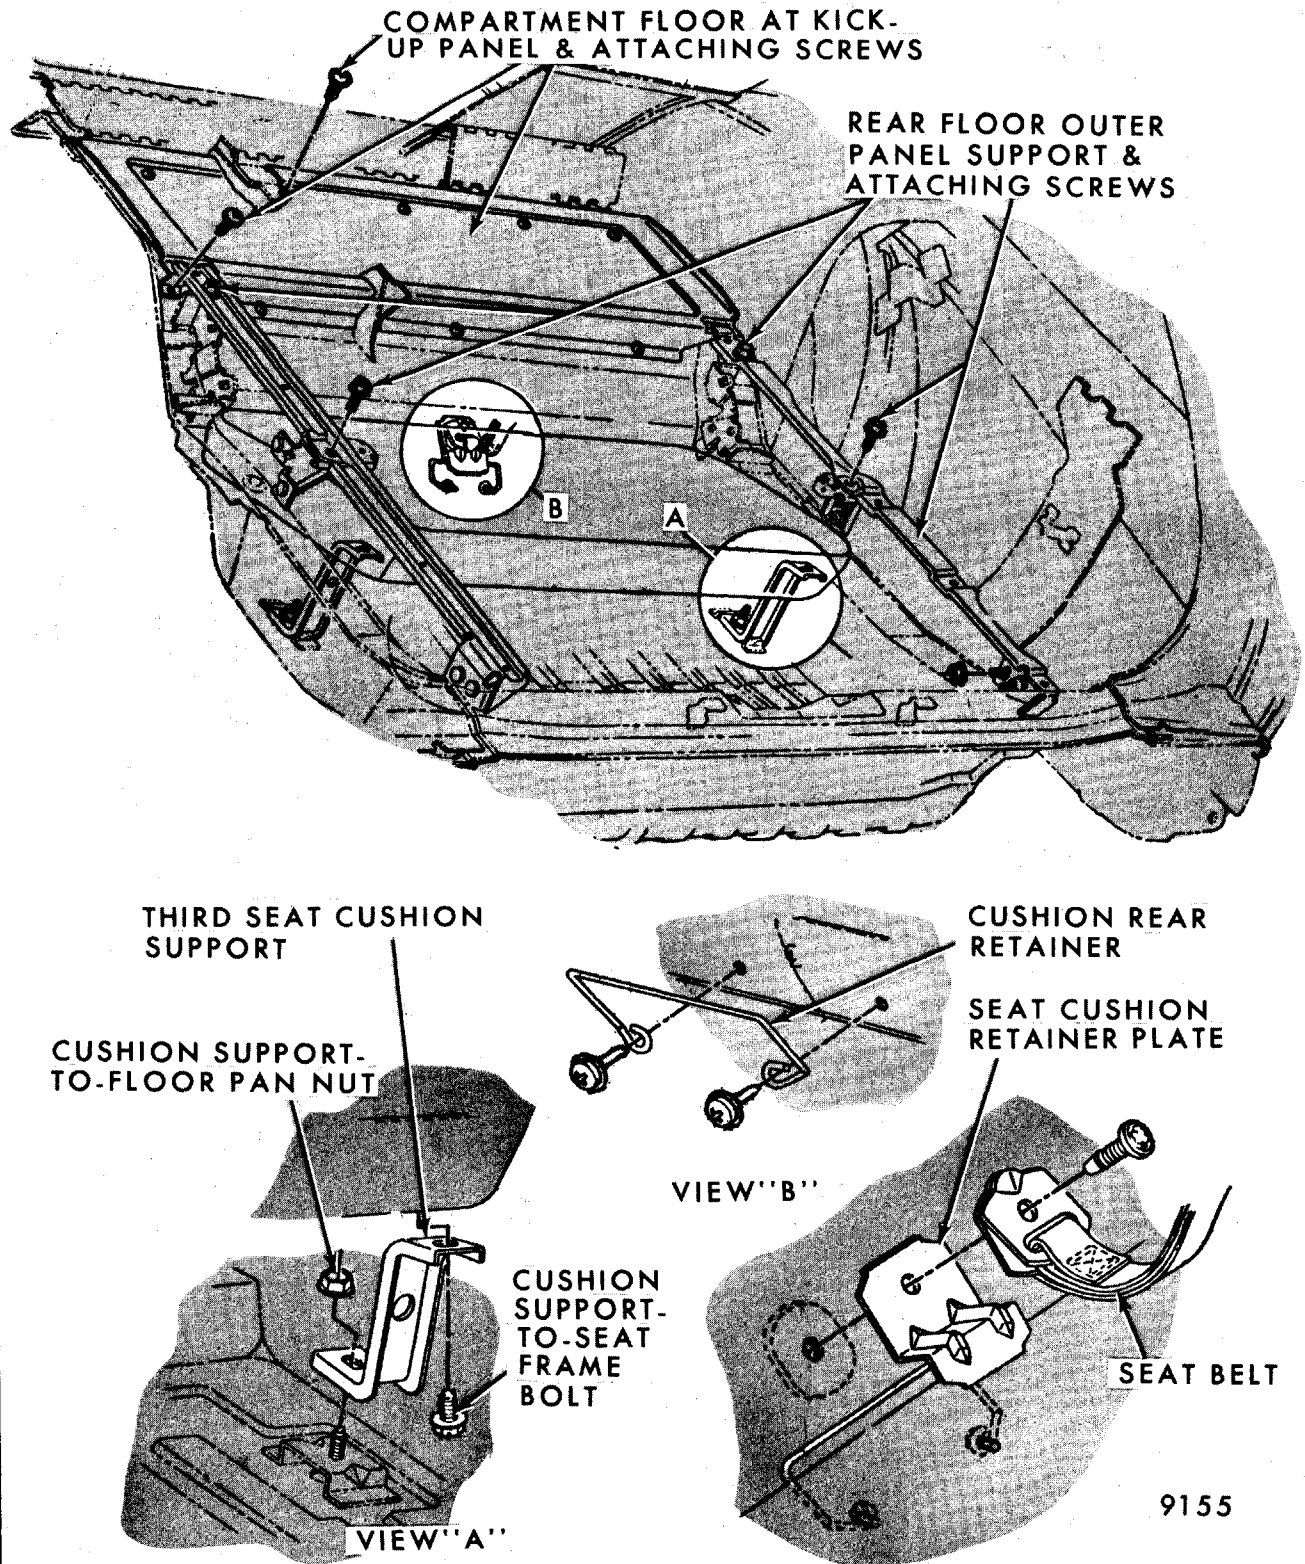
Folding Third Seat Cushion - "A" Body Three-Seat Styles
